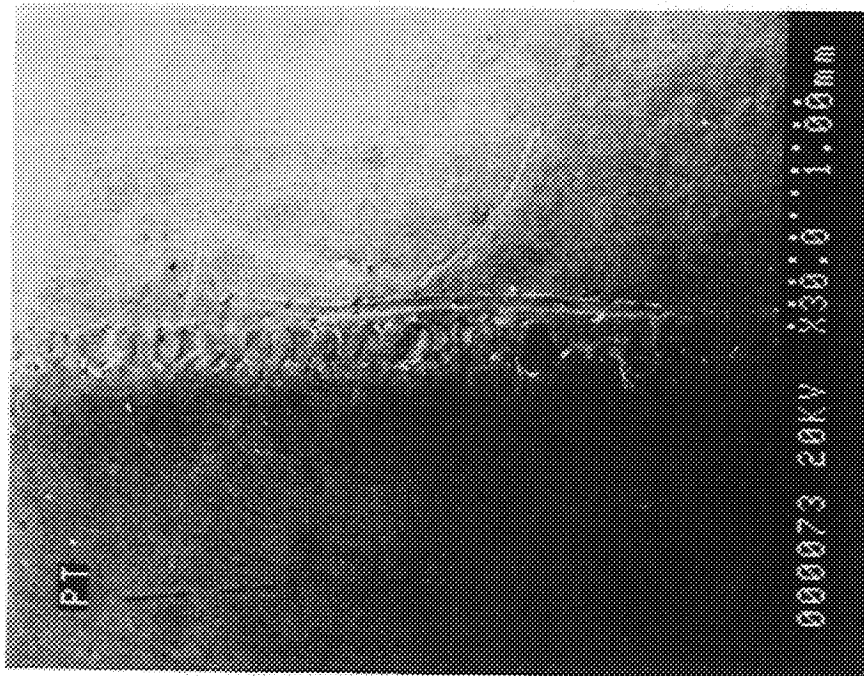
Electron Beam Welds on Platinum DTC Specimen
